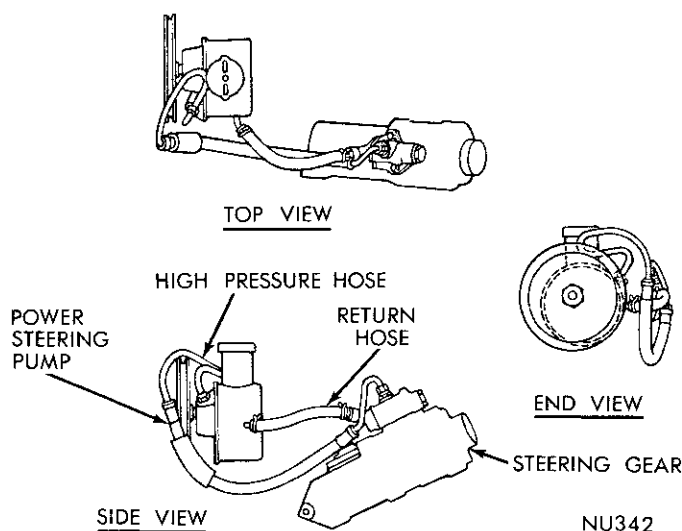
Hose Routing—1.06 Pump 8 Cylinder Engines
